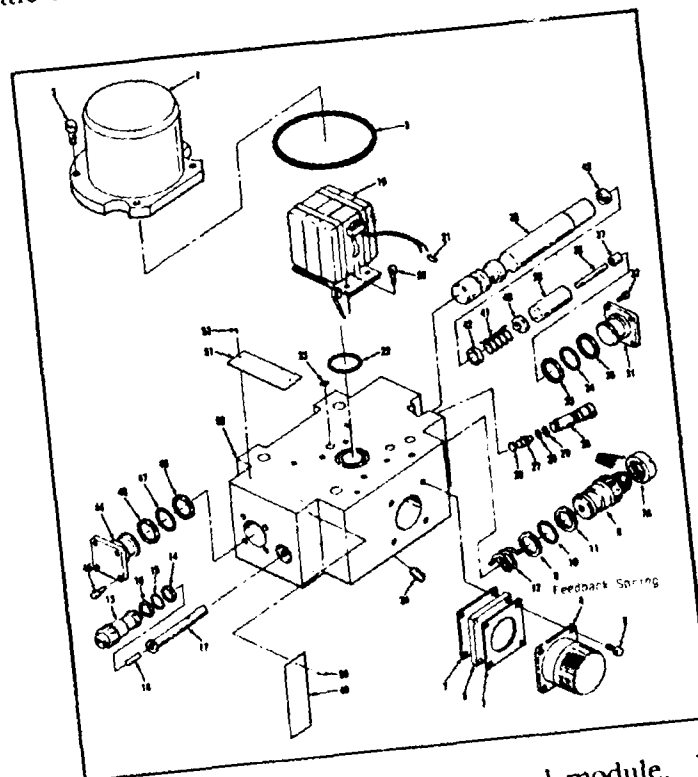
Breakout drawing of the autobrake control module. Item #12 is the feedback spring.
